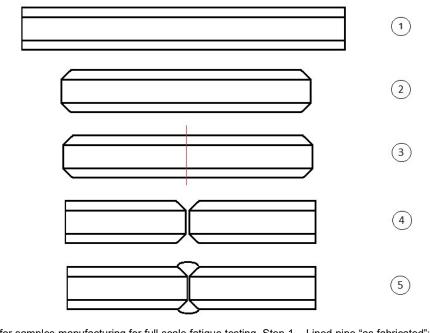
Steps for samples manufacturing for full scale fatigue testing. Step 1 – Lined pipe "as fabricated"; Step 2 – Cut-out of clad welds in order to turn their lengths adjusted to 50mm +0 – 10mm (see 7.3.2.1.1) and subsequent beveling for girth weld; Step 3 and 4 – Cut pipe in two halves and turn lengths; Step 5 – Girth welding of both halves.
